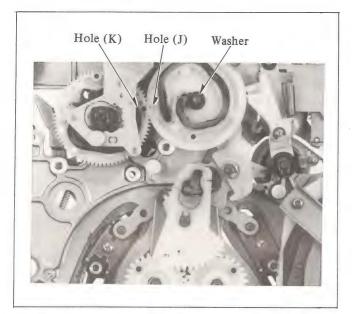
Assembly and Adjustment of Gears and Rods-(8)
